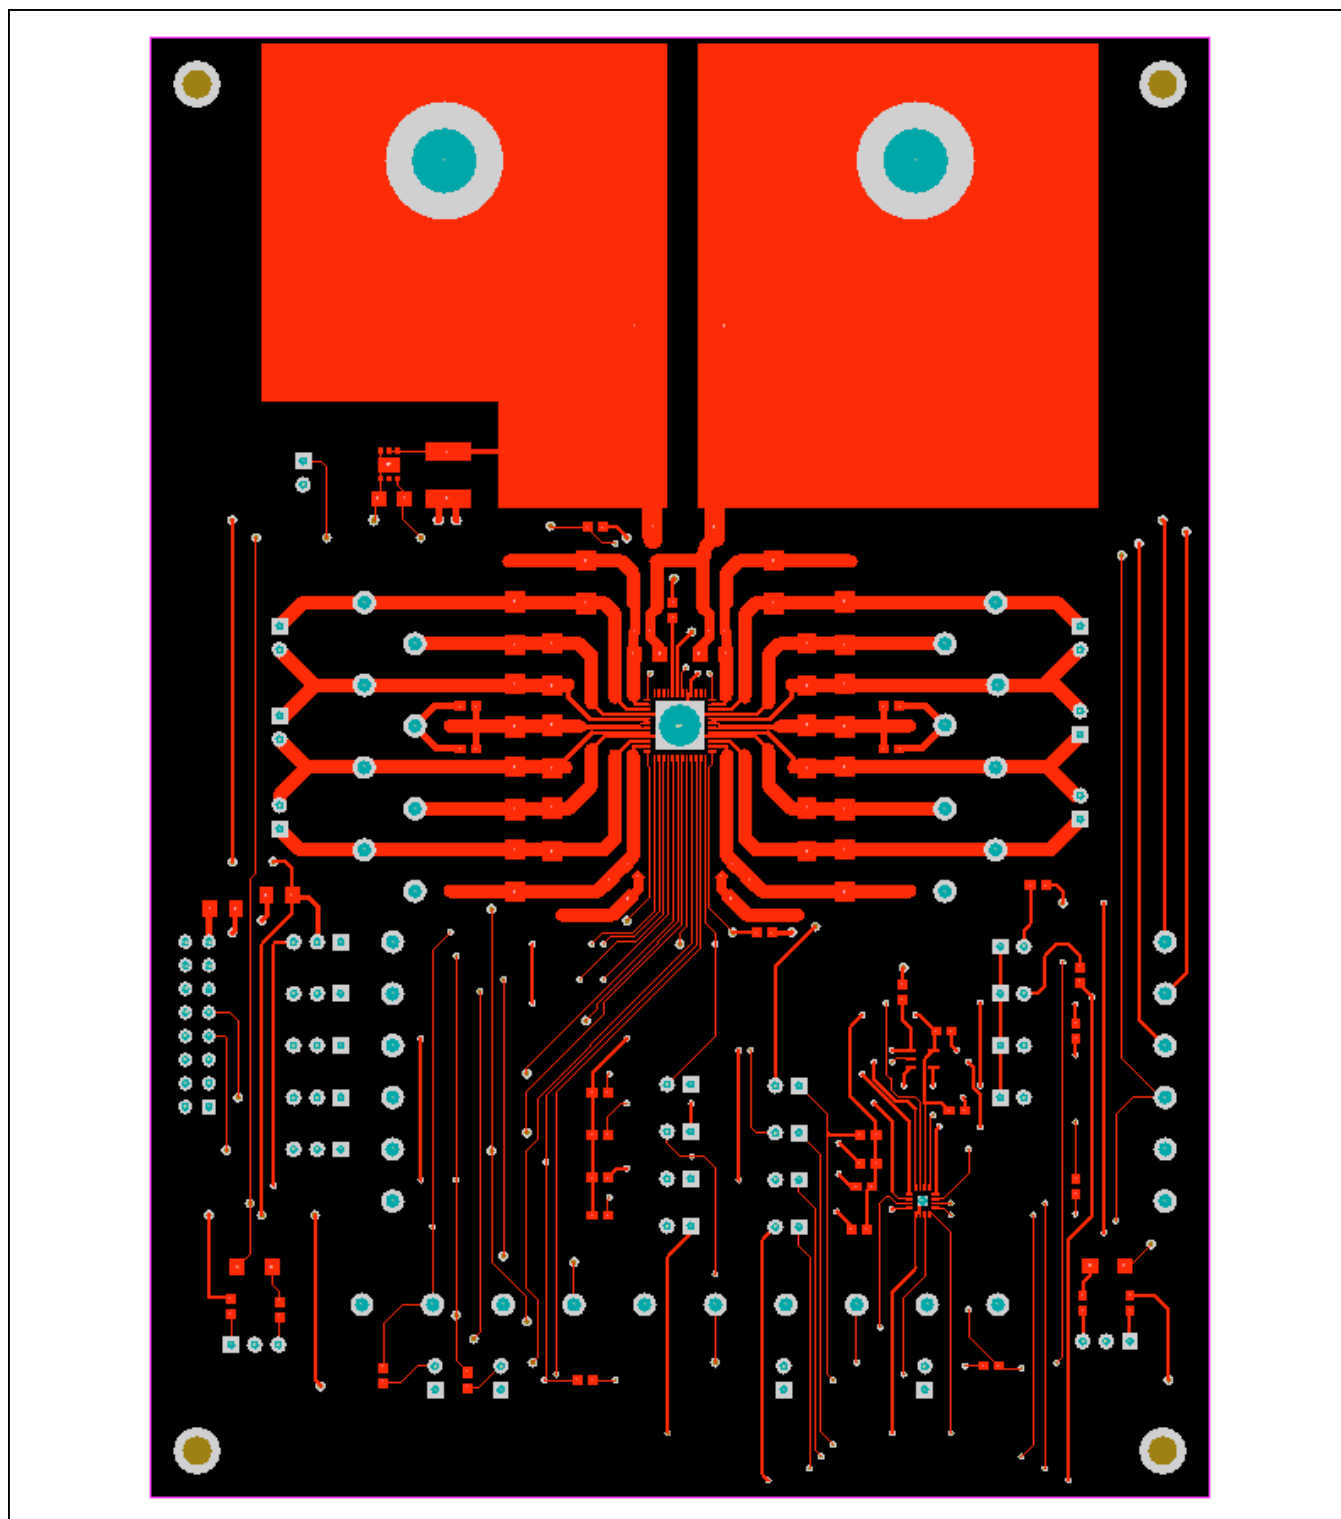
MAX14900E EV Kit PCB Layout—Top Layer
